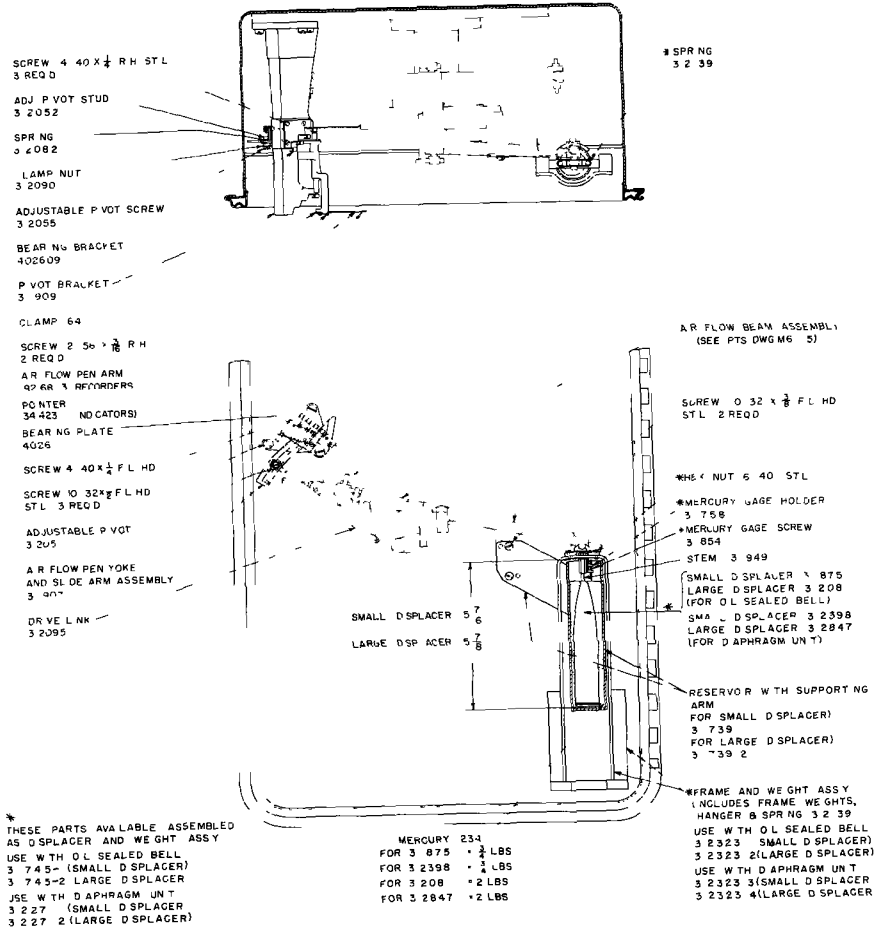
Parts Drawing M61 5, Type CE Displacer Mechanism
